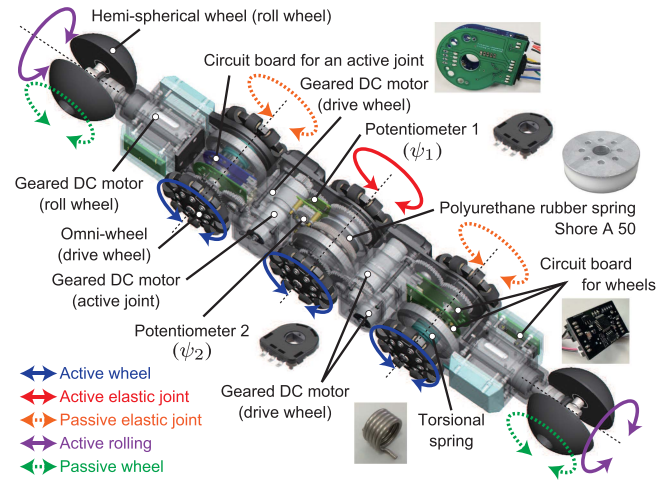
CAD model of the in-pipe inspection robot AIRo-5.2.
